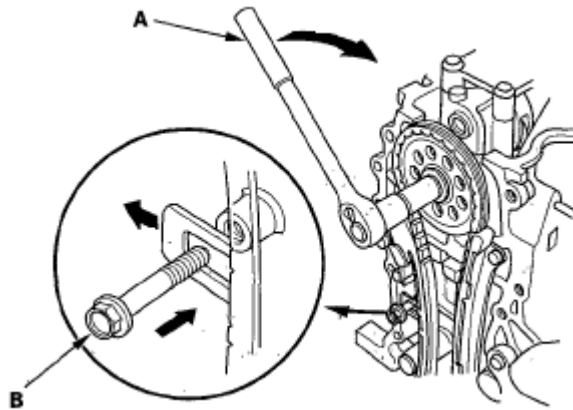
Holding Crankshaft Pulley & Set Socket Wrench On Camshaft Sprocket Bolt
